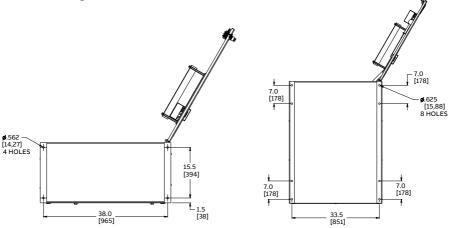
Automatic transfer switches, Floor mounting hole dimensions for 63L 400-1200 A.
